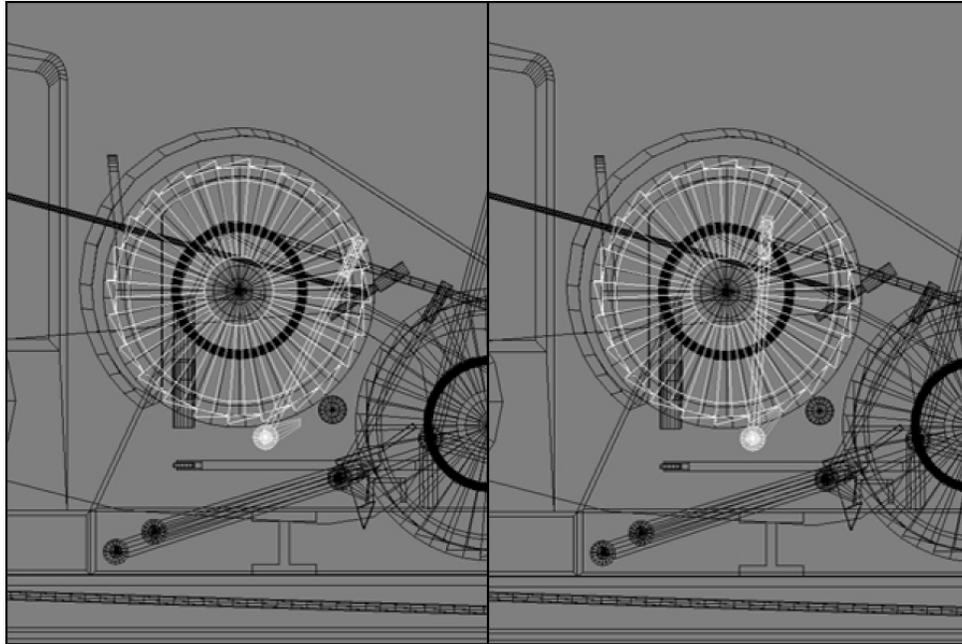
Operation of the winch pawl on the *Athena 106*. Both winch drums are shown. The white ring on the upper drum (which controlled the aft spud) is a ratcheted gear bolted to the outside of the drum. The operator engages or disengages the pawls using the lever, shown in white, that extends downward across the gear. The pawl is the tongue-shaped piece at the bottom of the lever. When disengaged (left illustration), the pawl is outside the gear teeth, allowing the gear to move freely in either direction. When engaged (right illustration), the pawl falls into the spaces between the notches so the gear can move in only one direction. (See figure 8 for location of pawl lever at operator's station.)
